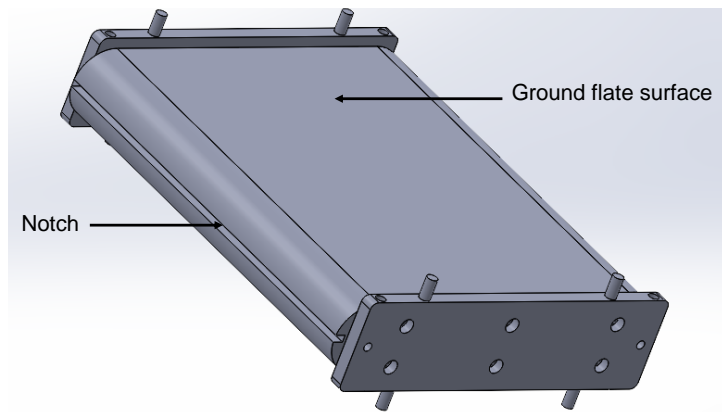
3D model of the mould used to manufacture composite plates by filament winding method
